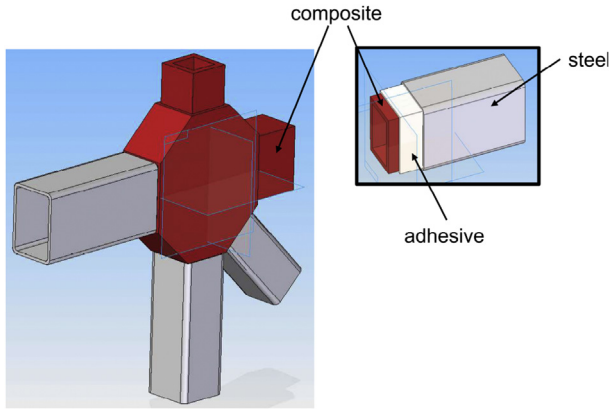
Proposed new design of CFRP node adhesively bonded to steel beams of the bus structure.
